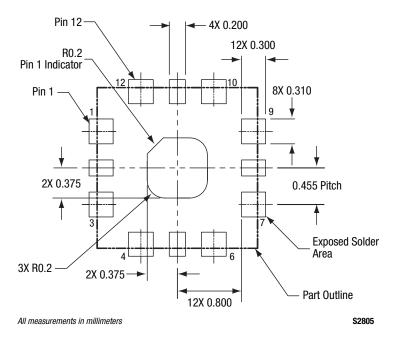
SKY13405-490LF PCB Layout Footprint (Top View)
